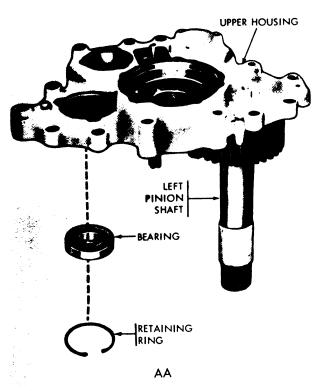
Traversing gearbox disassembly or assembly (9 of 15).
